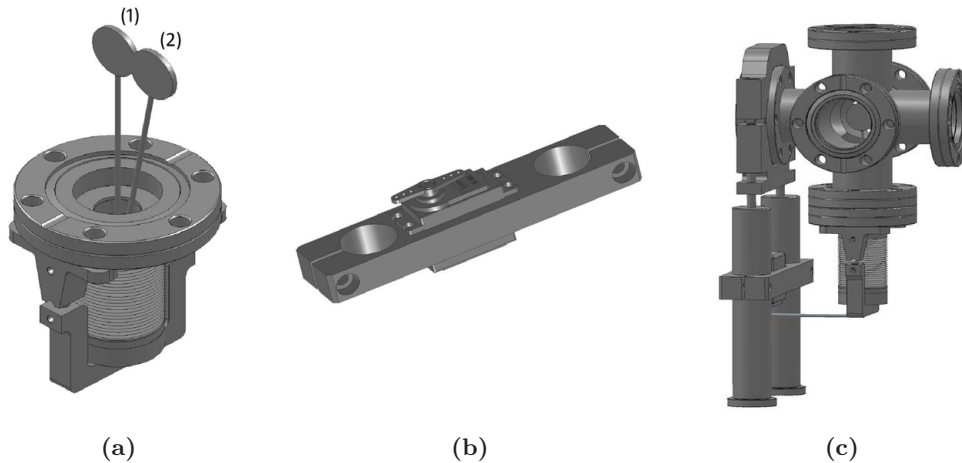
Technical drawings of the atomic beam shutter. (a) The shutter unit, in position (1): 'blocked beam' and in position (2): 'unblocked beam'. (b) The servo motor with mounting. (c) The complete assembly to the vacuum chamber, here the atomic beam enters from the front and is blocked.
